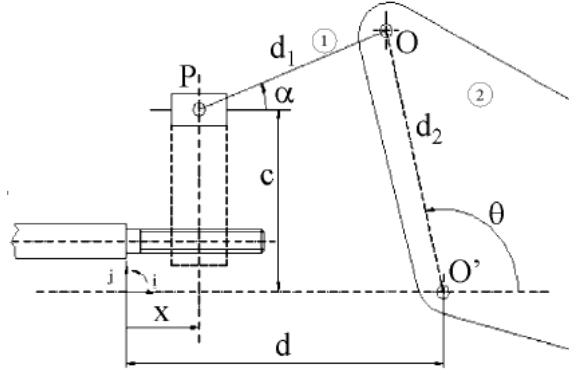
Detailed drawing of the slider crank mechanism in the MP joint.
